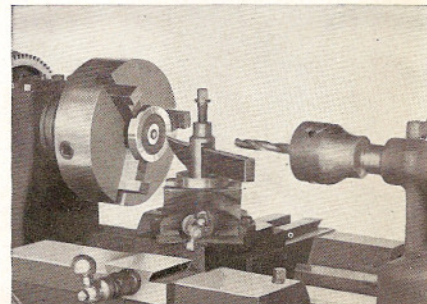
Drilling and Facing Iron Blank. Drill Chuck Mounted in Tail Spindle.
